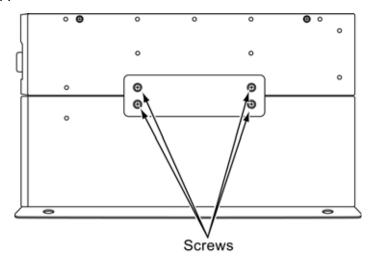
Install CHS2U JOINT BRACKET KIT
